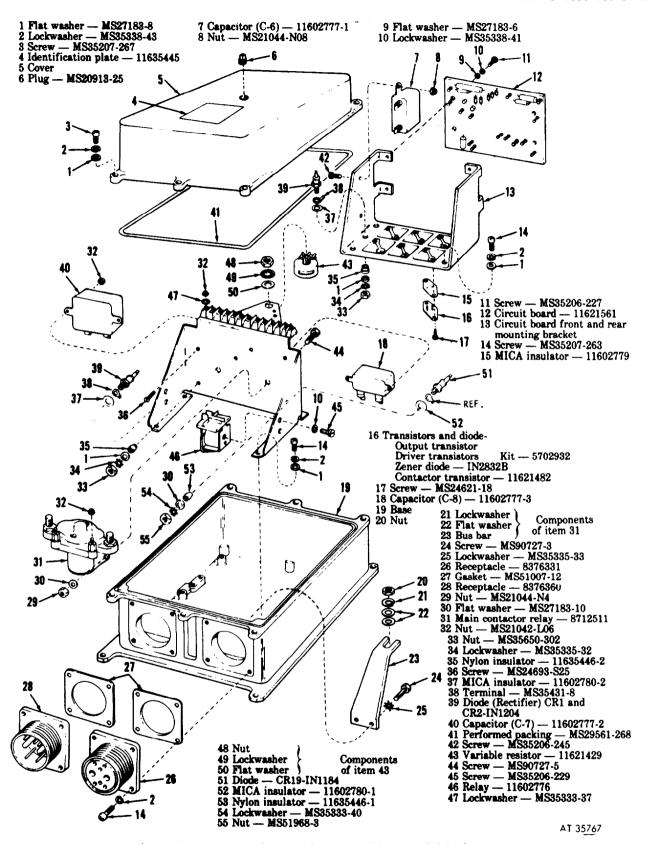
Generator voltage regulator - 11621812 - exploded view.
